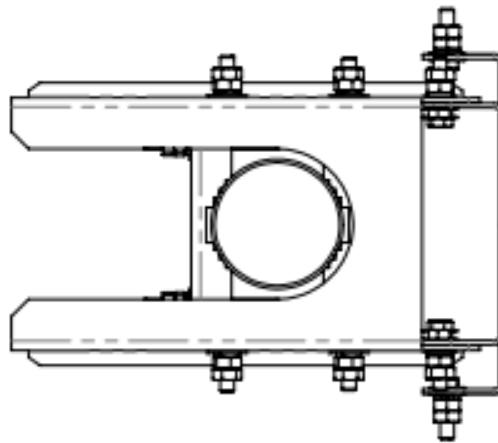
Mounting bracket to pole installation, Bottom and Top bracket assemblies – TOP VIEW
